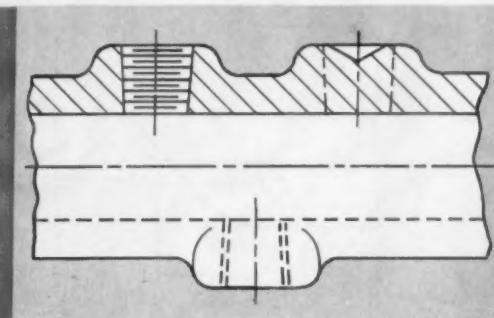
In this hydraulic oil piping manifold, considerable layout time is saved due to the fact that drill point indentations are cast in the center of each boss provided on the part.
